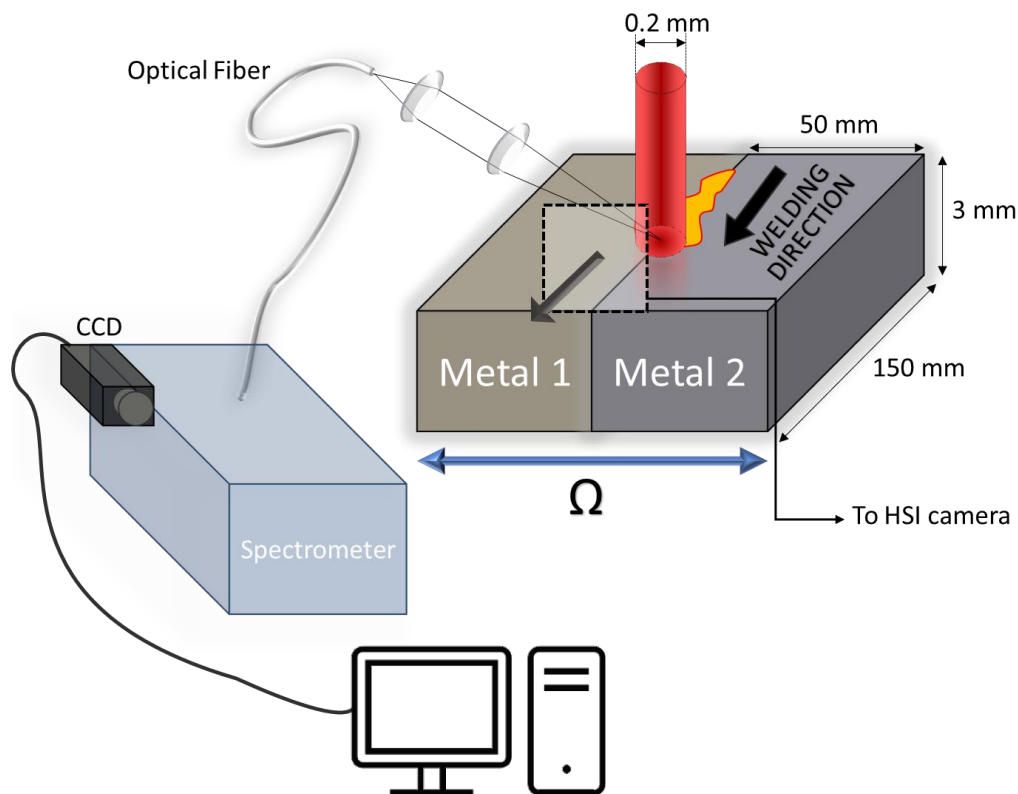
Schematic for continuous welding in butt configuration (not to scale).
